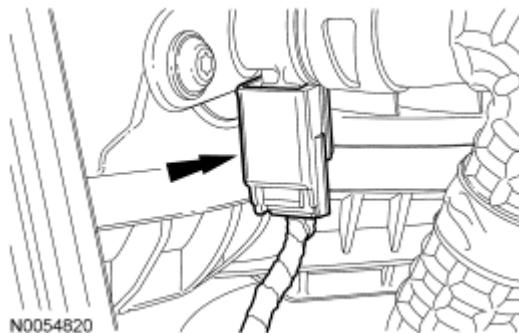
Identifying Positive Crankcase Ventilation (PCV) Fitting Electrical Connector
